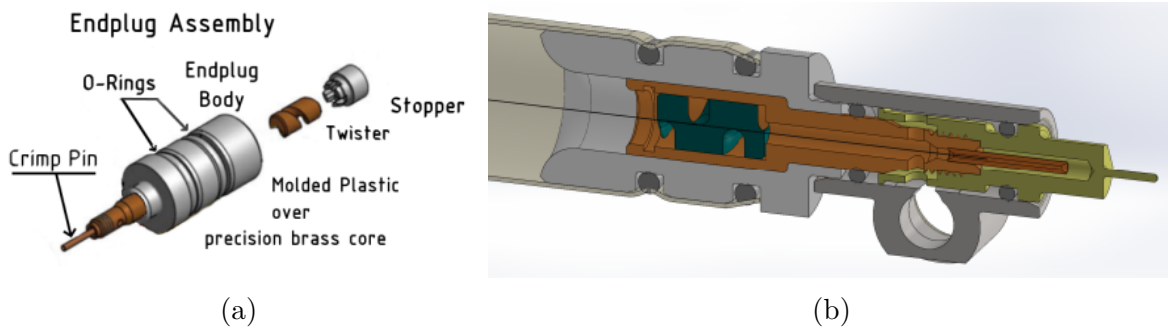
(a) Exploded diagram of endplug assembly. (b) Cross-section of assembled tube with signal-cap (yellow), gas manifold (gray) and twister (blue) [16].
